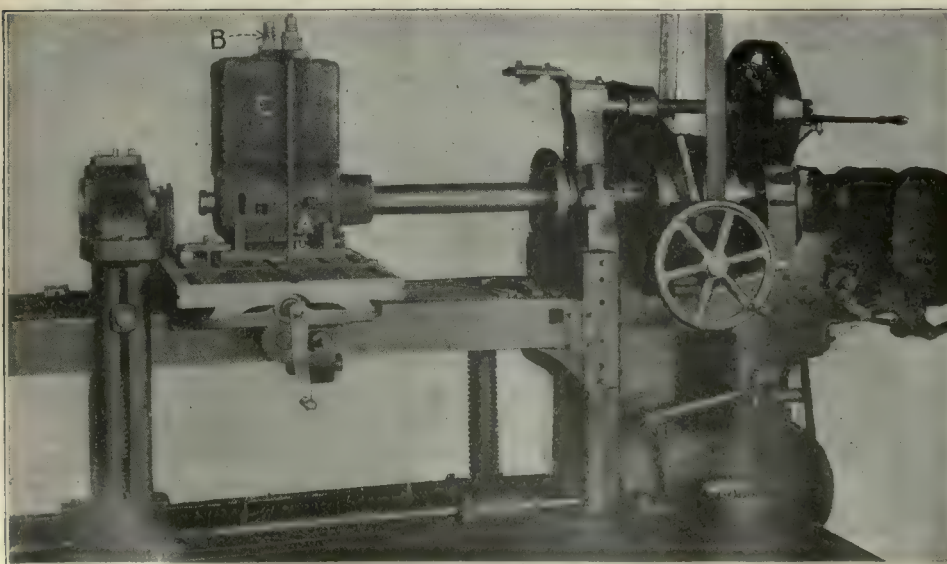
BORING LARGE ENGINE CYLINDER ON GISHOLT HORIZONTAL MACHINE
